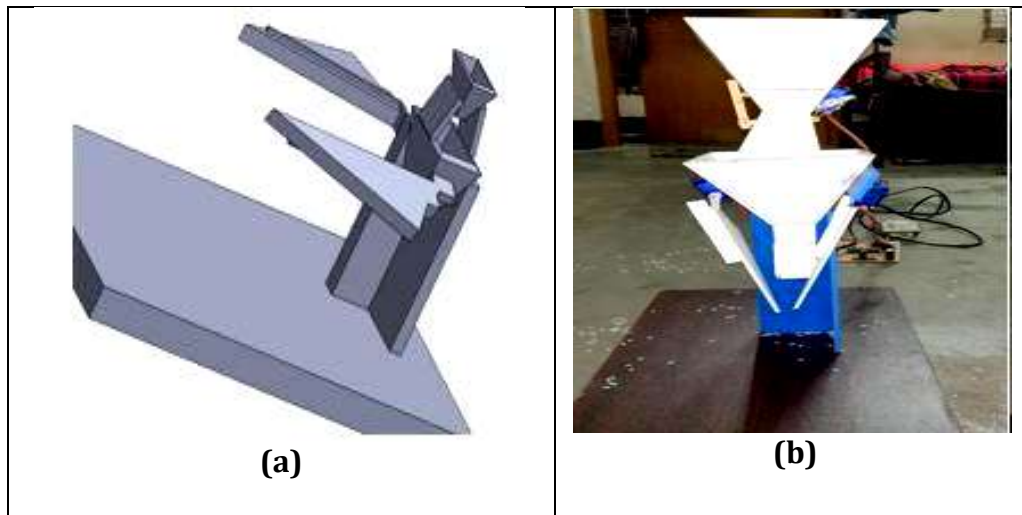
Automated Filler Part of This Sealing System (A) CAD Design (B) Constructed View
